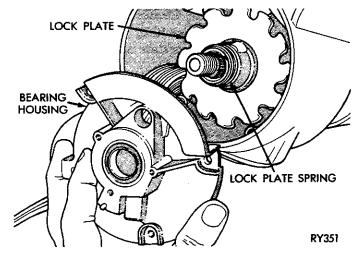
Bearing Housing & Lock Plate Removal LOCK HOUSING DISASSEMBLY
